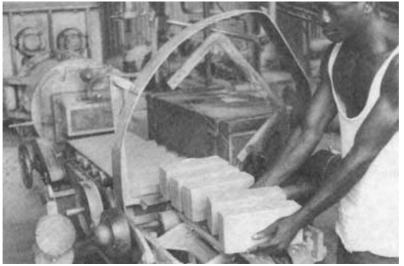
Wire-cutter and wire-cut bricks (Ghana)
